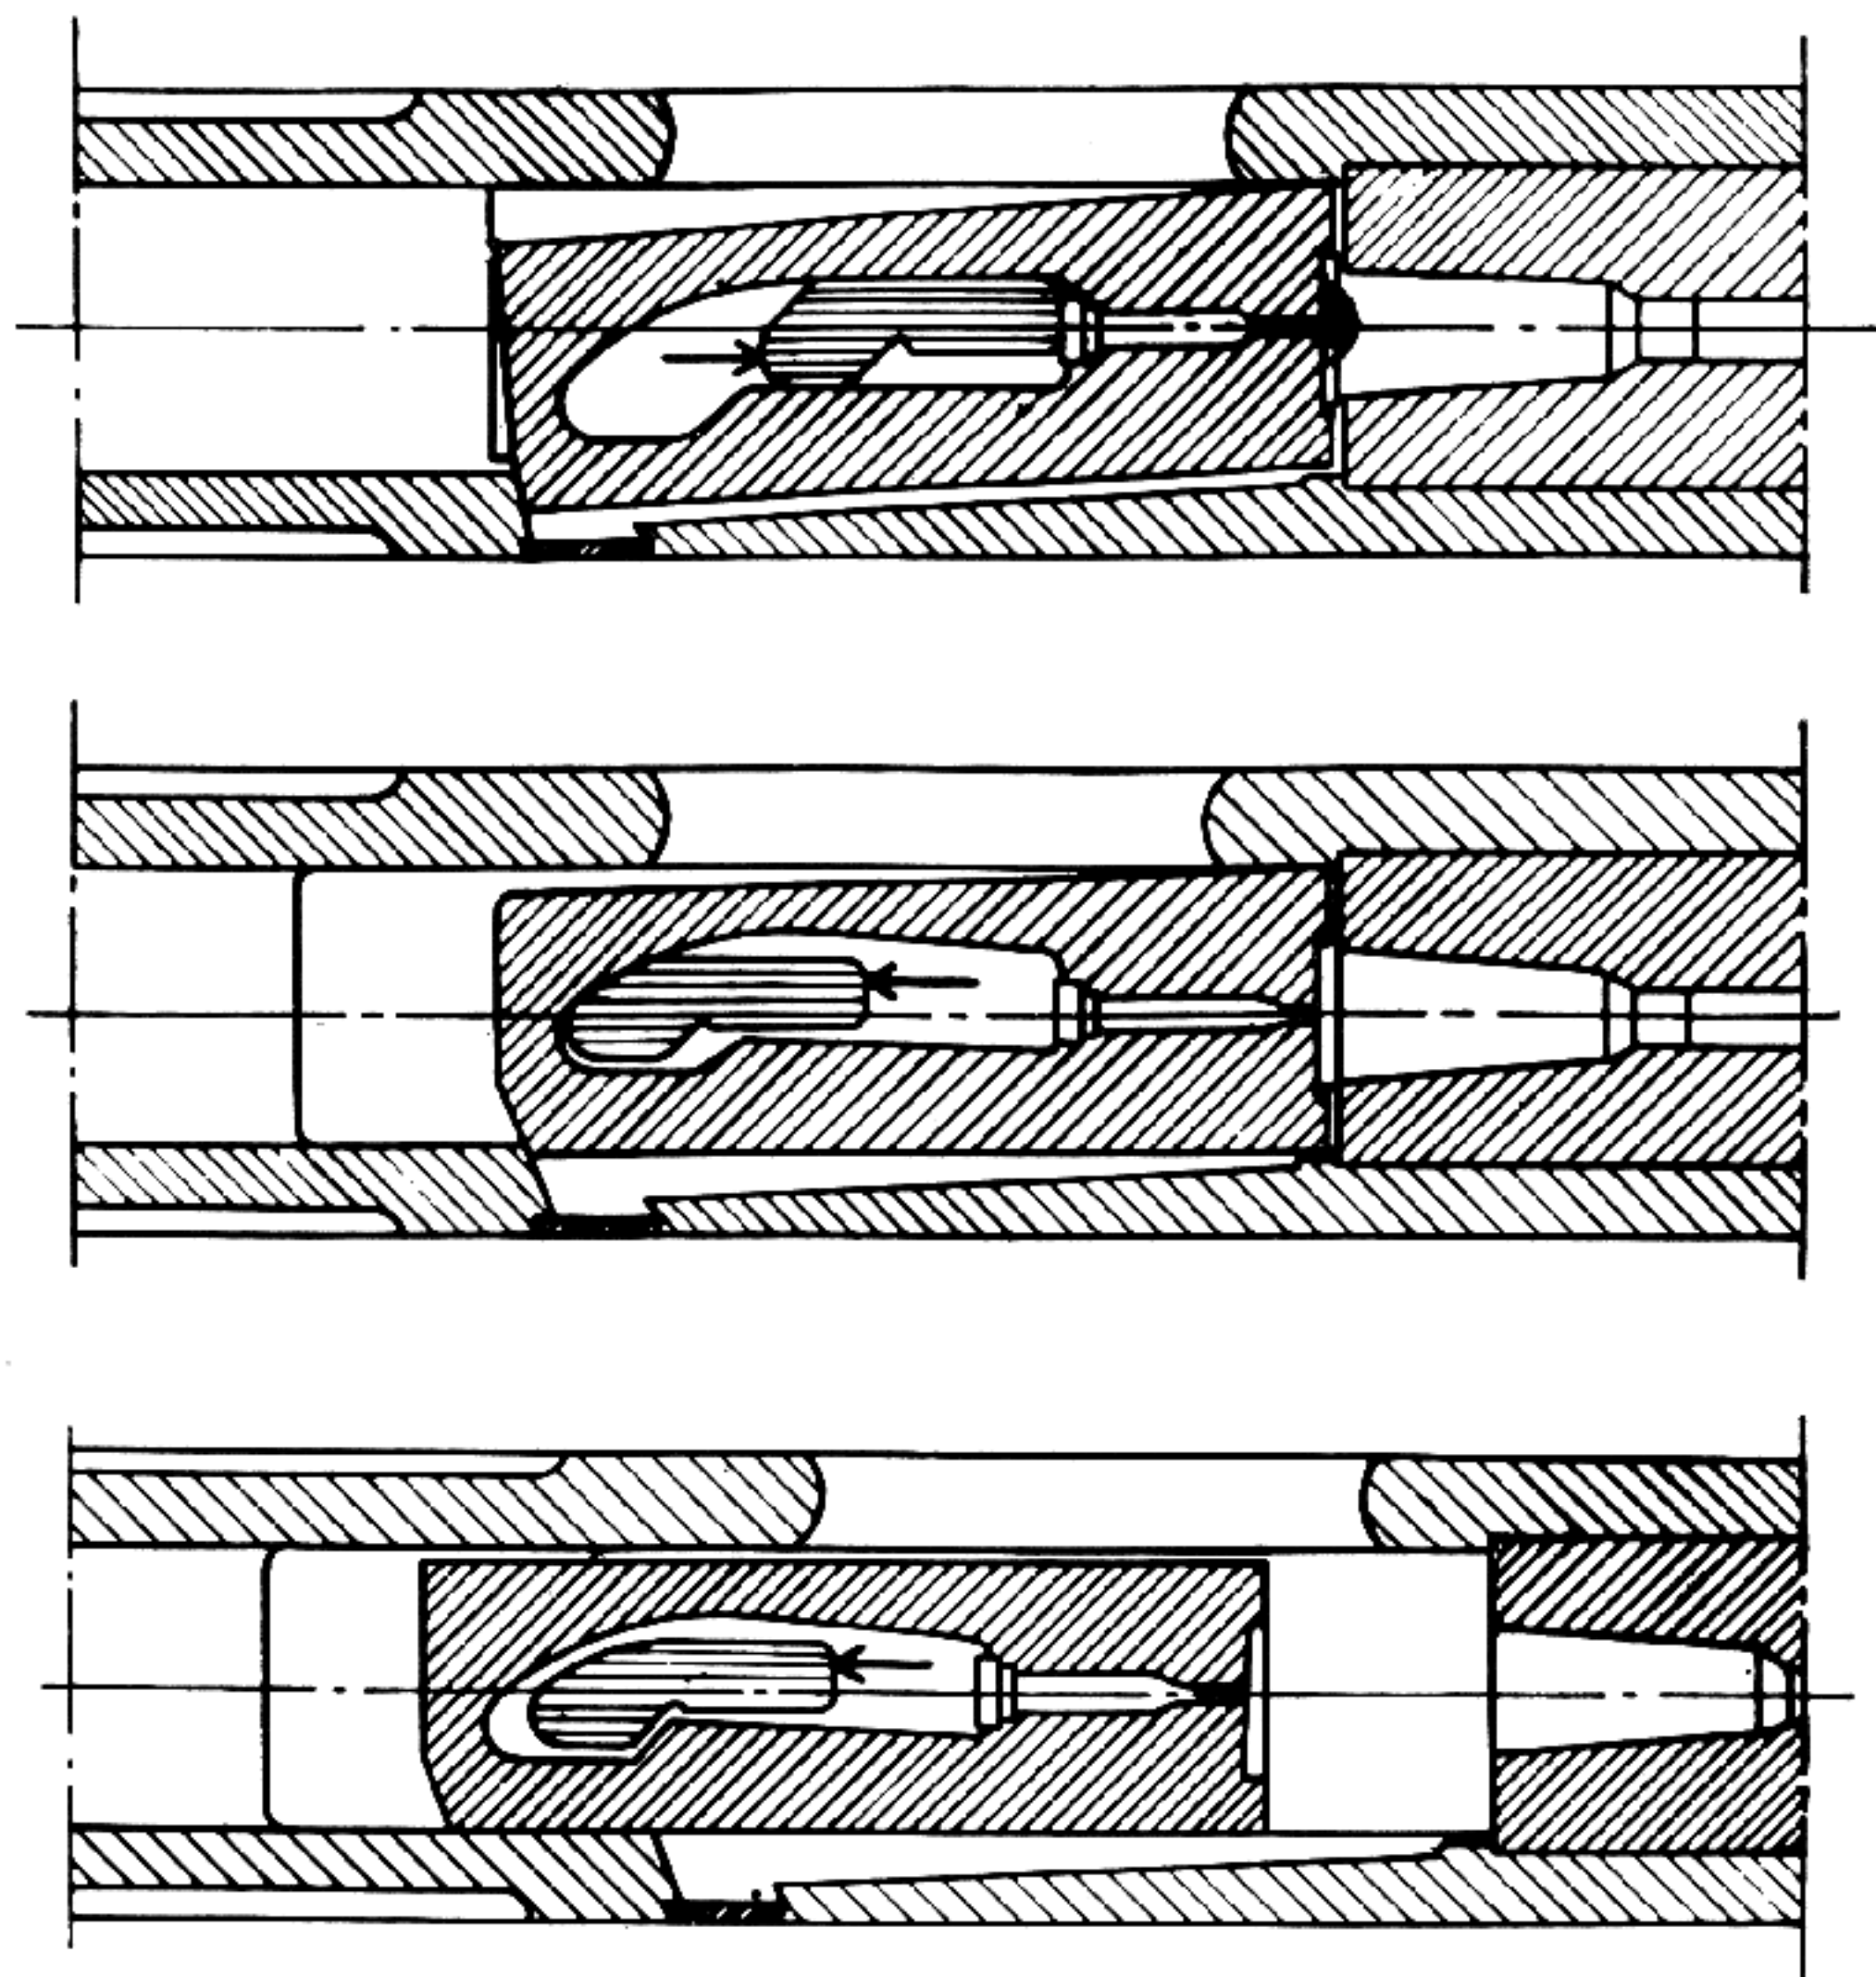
Plan of locking feature of the Goryunov Machine Gun. The steps shown are, top to bottom: ignition phase; unlocking; rear stroke.
